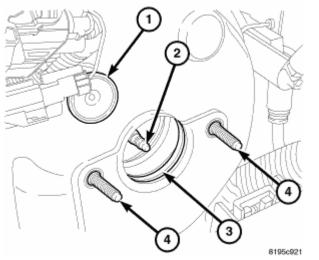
Identifying Brake Booster & Brake Booster Studs Courtesy of CHRYSLER LLC
